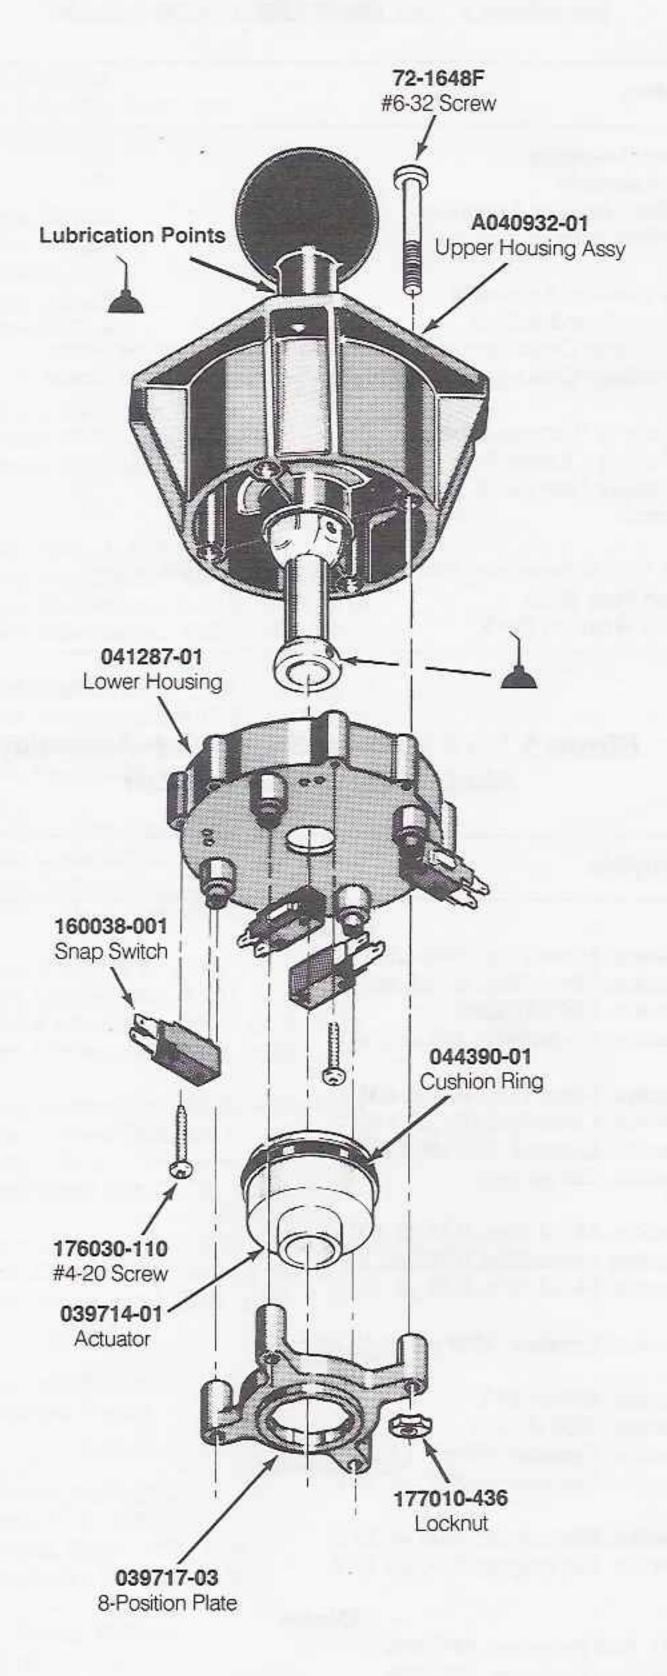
8-Position Joystick Assembly A040933-03 D
